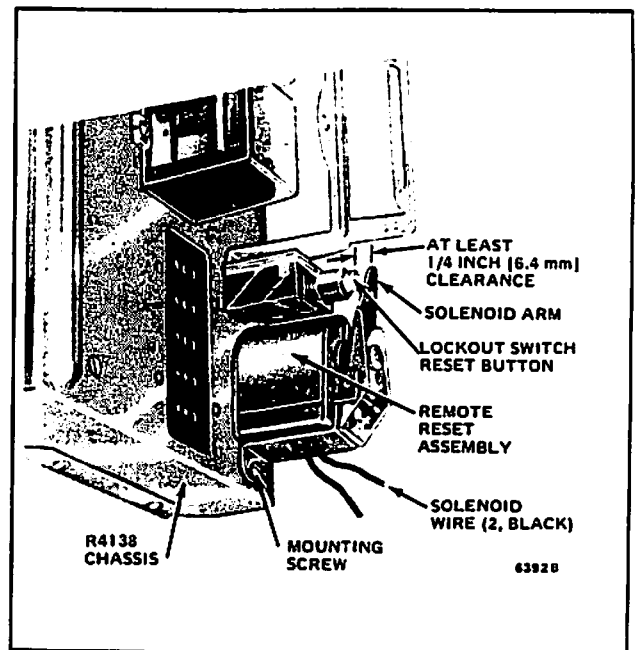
REMOTE RESET ASSEMBLY INSTALLED.
